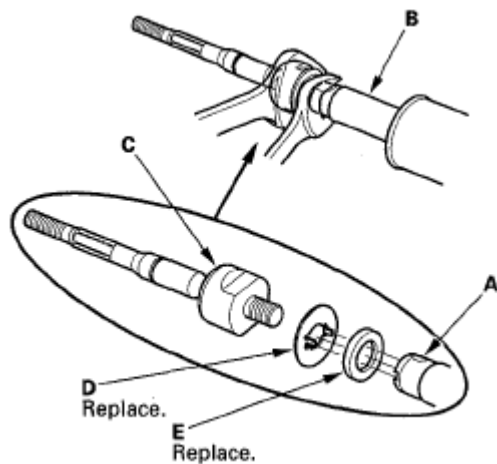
Identifying Flat Surface Sections Of Steering Rack With Wrench
